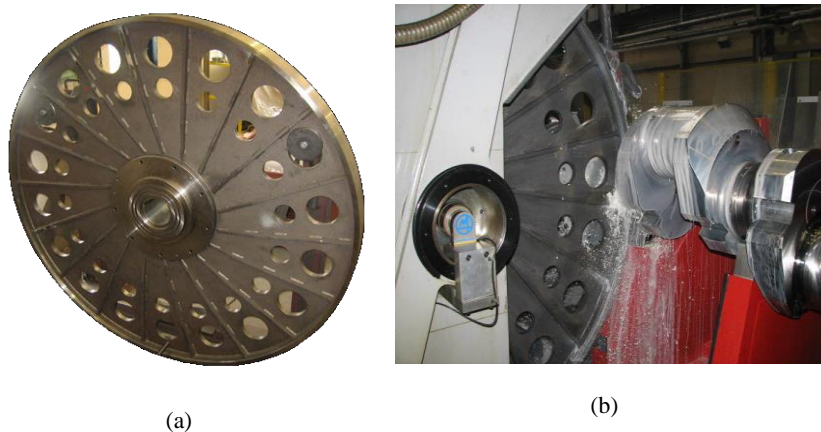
The grinding wheel MOLEMAB B126-100639 S.630090 type:
